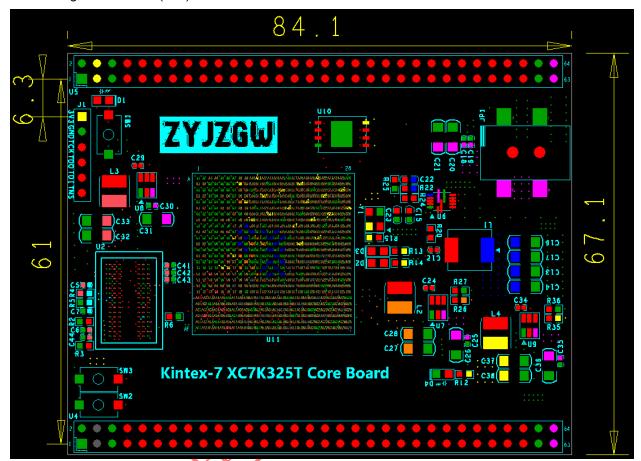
, ZYJZGW XC7K325T Core Board Dimension
